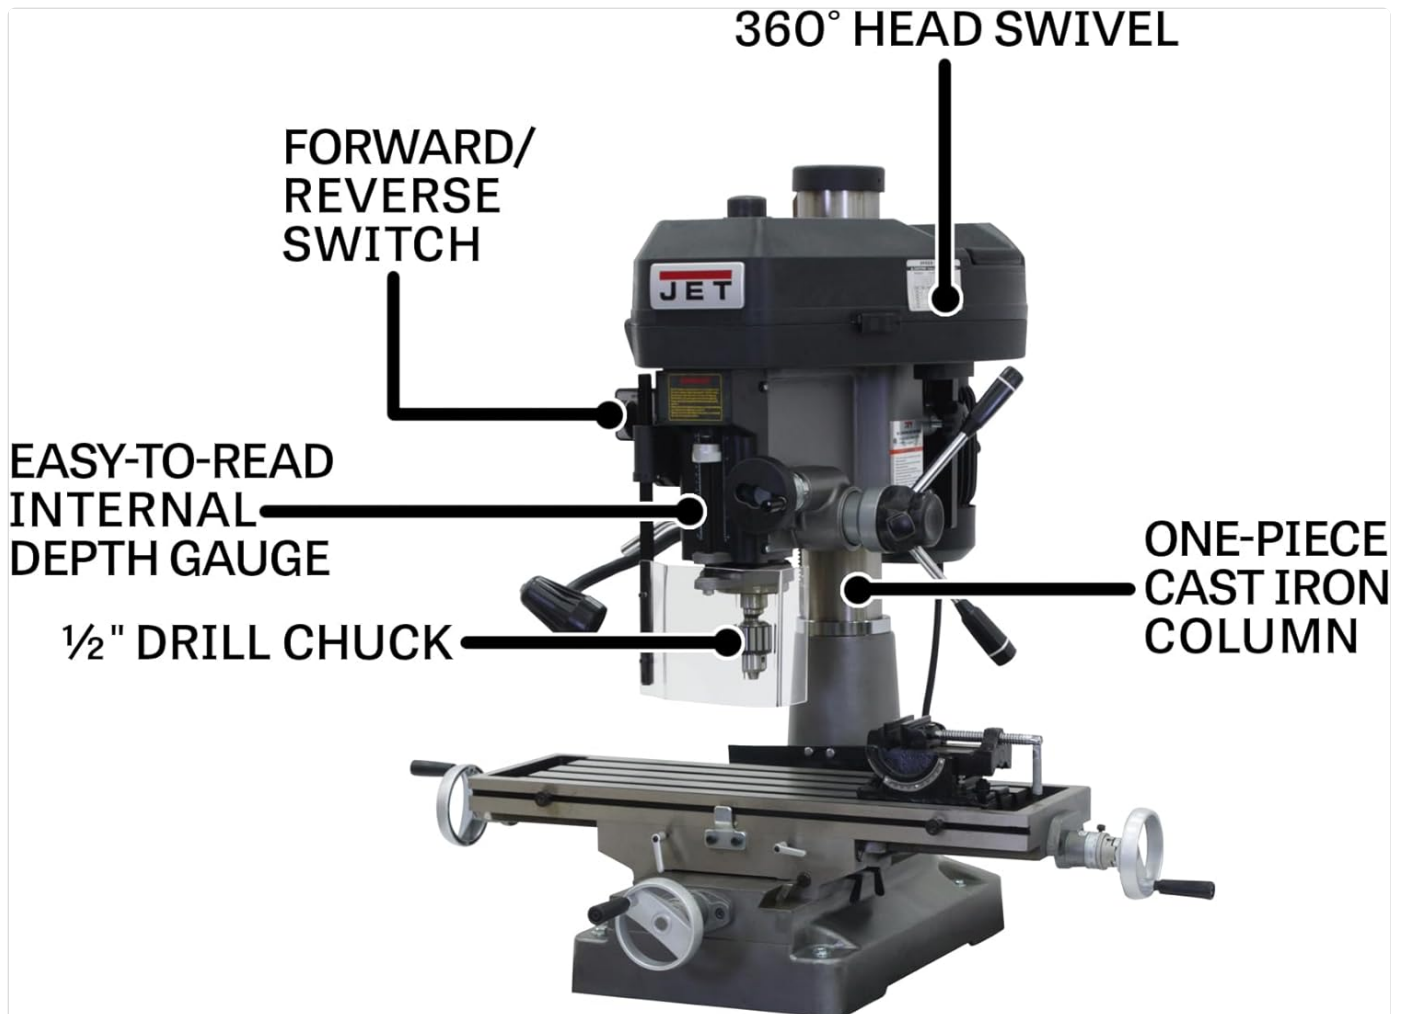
Key components and controls of the JET 18-Inch Mill Drill Machine.
